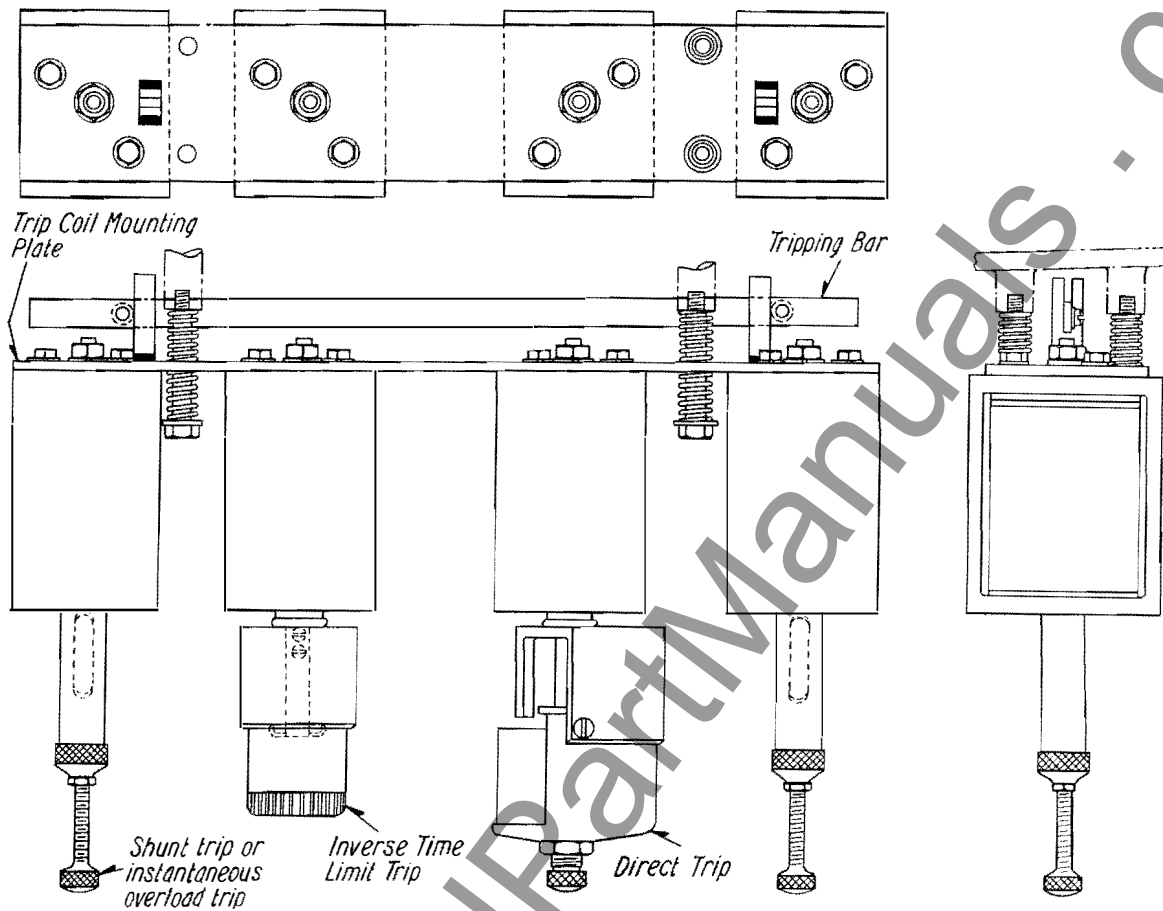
TRANSFORMER TRIP ATTACHMENTS AND MOUNTING PLATE
